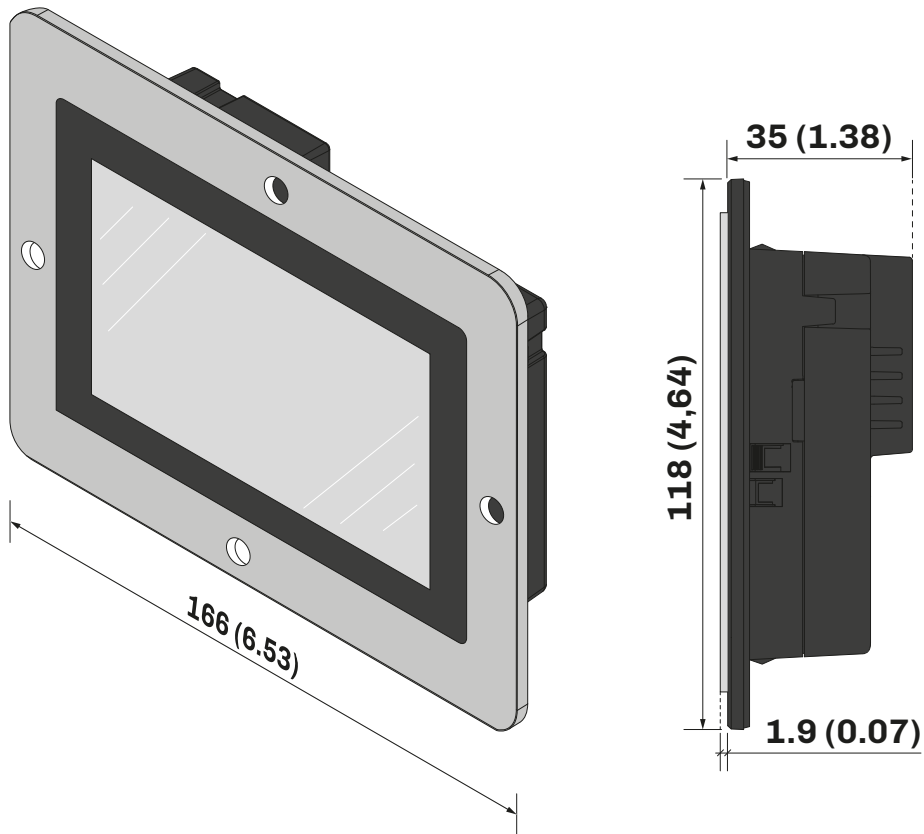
Panel-back mounting Vcolor 229-249 M user interface dimensions
